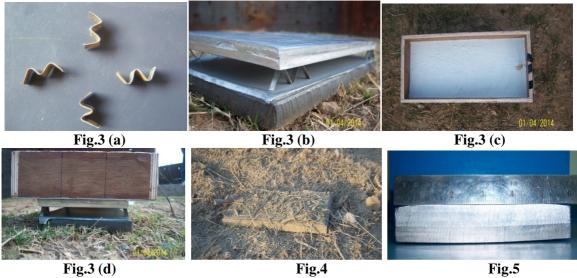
(a) Capital letter (M) Stand-off made up of aluminum. Fig3(b) Two plate Al-SS being placed at a predetermine distance with the help of stand-off, Fig3(c) Explosive welding trial set up(top view), Fig3.(d) Explosive welding trial set up(side view).
